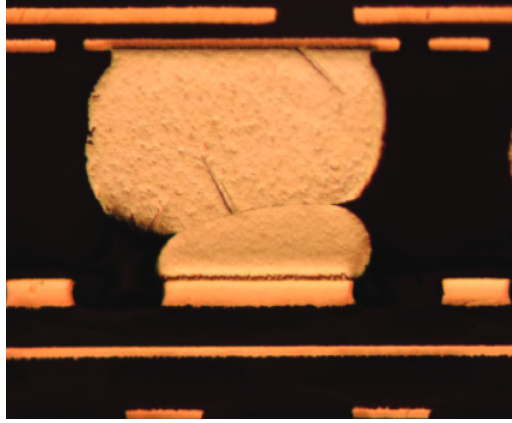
Head-in-pillow defect that can be seen on the solder pads of BGA typed components. [11]
